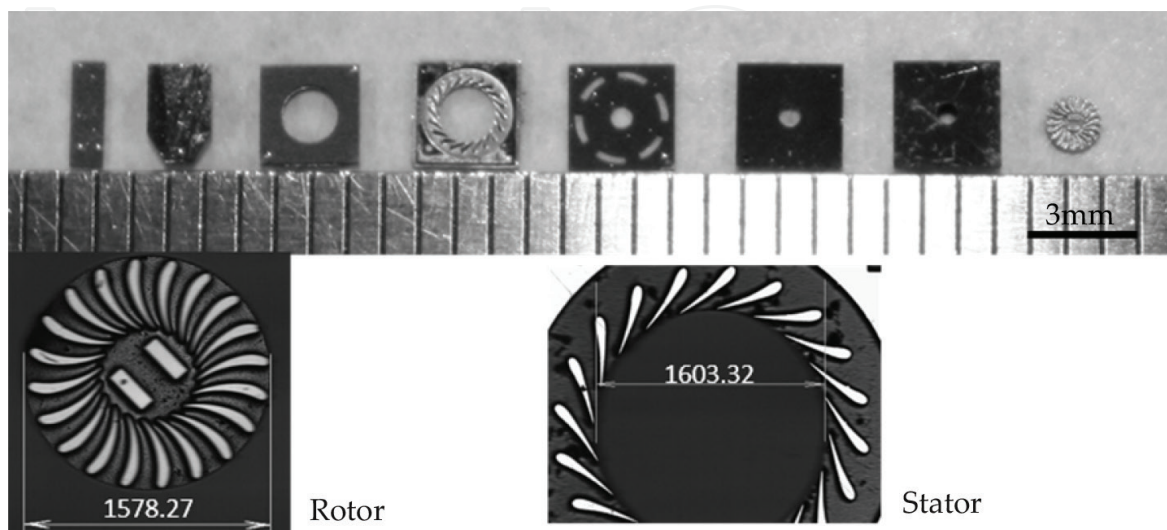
Fabricated fluid dynamic bearing system air turbine components.
